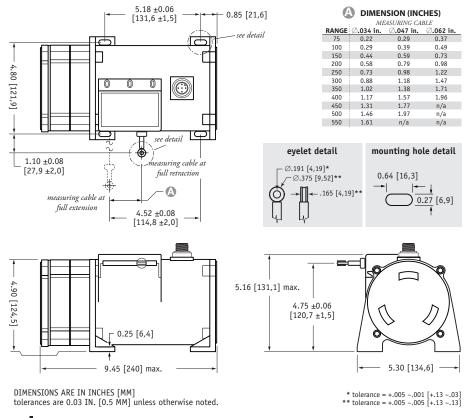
Outline Drawing (52 oz. cable tension only)
